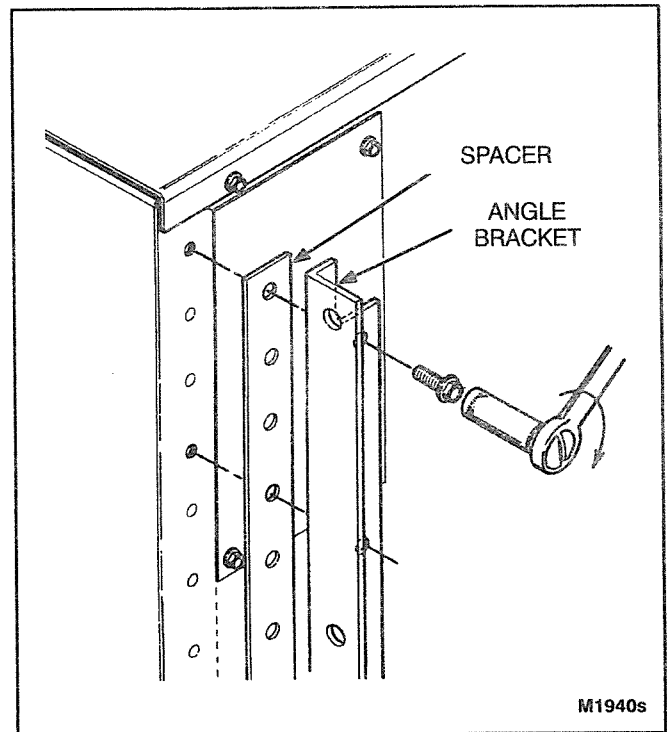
MOUNTING ANGLE BRACKET TO POWER UNIT
